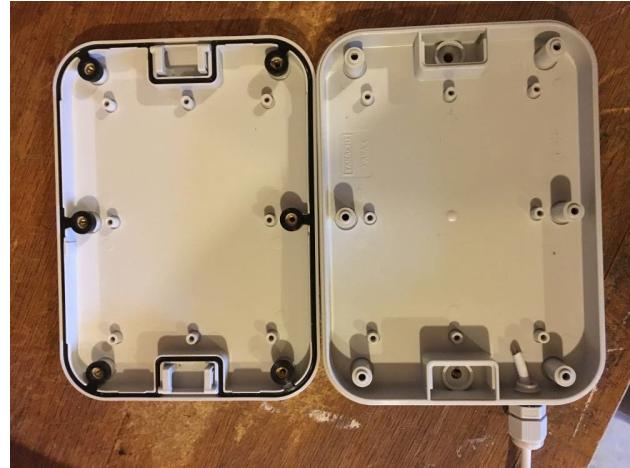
COTS housing with cable gland installed in the lower right hand corner
